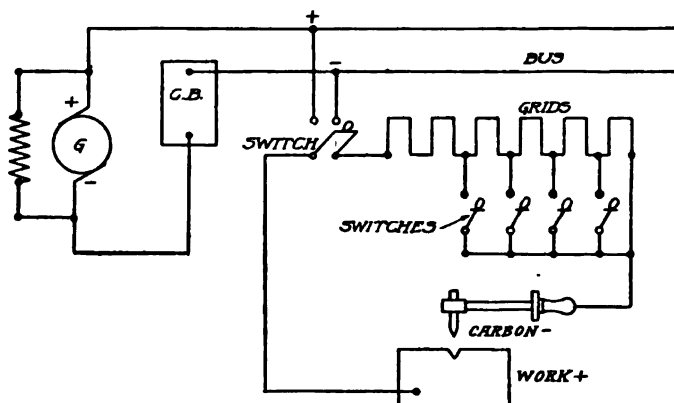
Wiring Diagram for Lincoln Arc Welder
